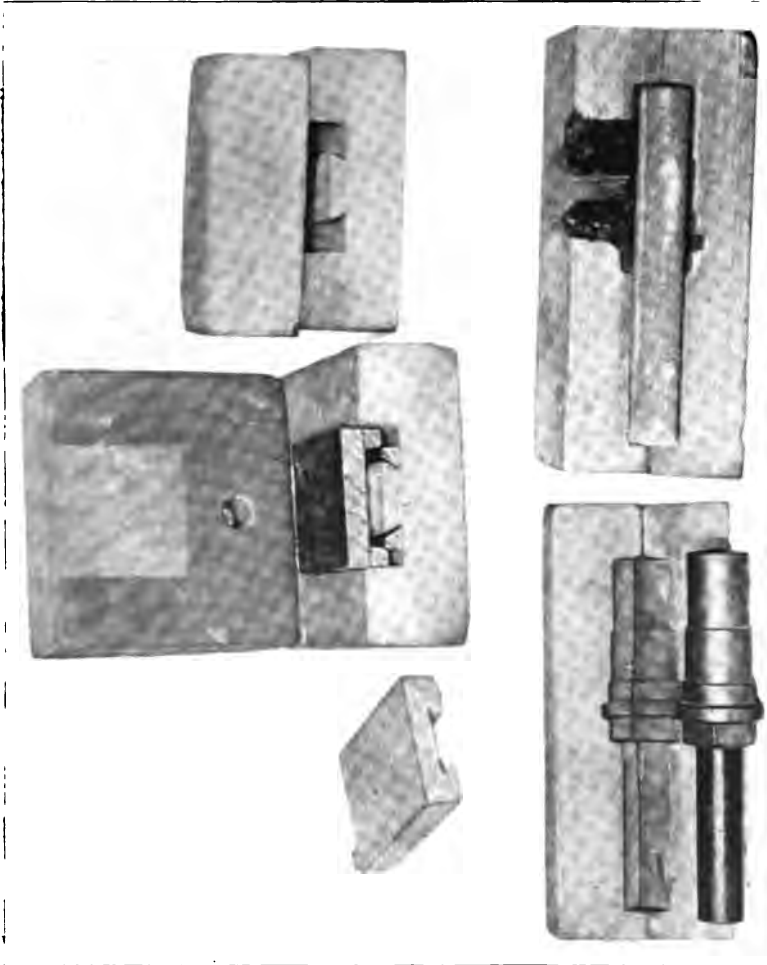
MOLDING A LOOSE PIECE PATTERN.
